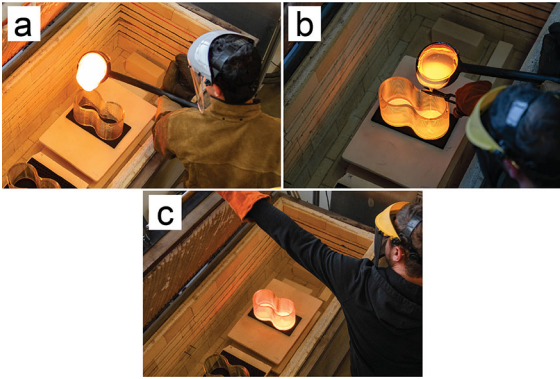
PC casting process. A FH unit is brought to 616 °C in a glass casting kiln. B Molten glass is ladled into the interior of the masonry unit on top of a graphite mold. C The bottom of the masonry unit is fully filled and casting kiln is closed
